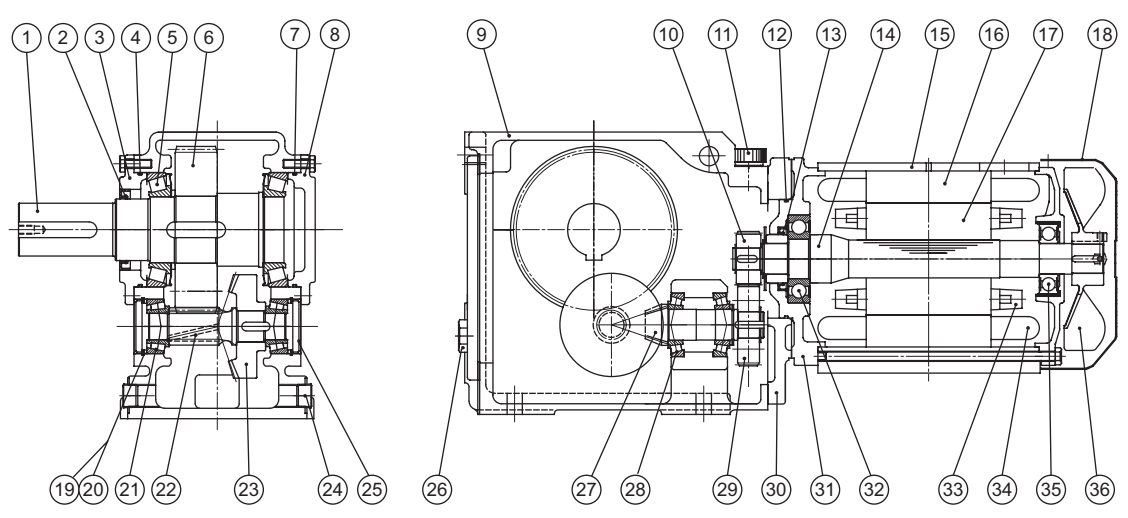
Foot Mount Type Gearmotor (Example: KHHM-72R-K1)
